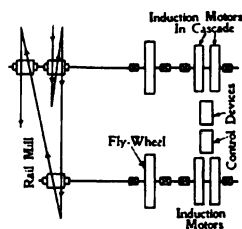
TYPICAL LAYOUT OF LIGHT RAIL AND BAR MILL WITH MULTI-SPEED INDUCTION MOTOR DRIVE
